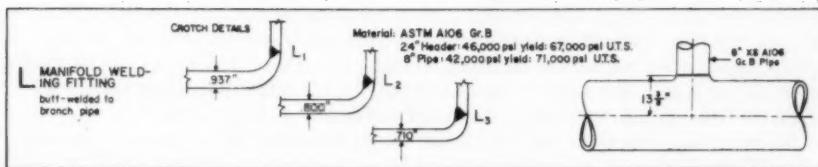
Specimens for Series III Cyclic Pressure Tests.
